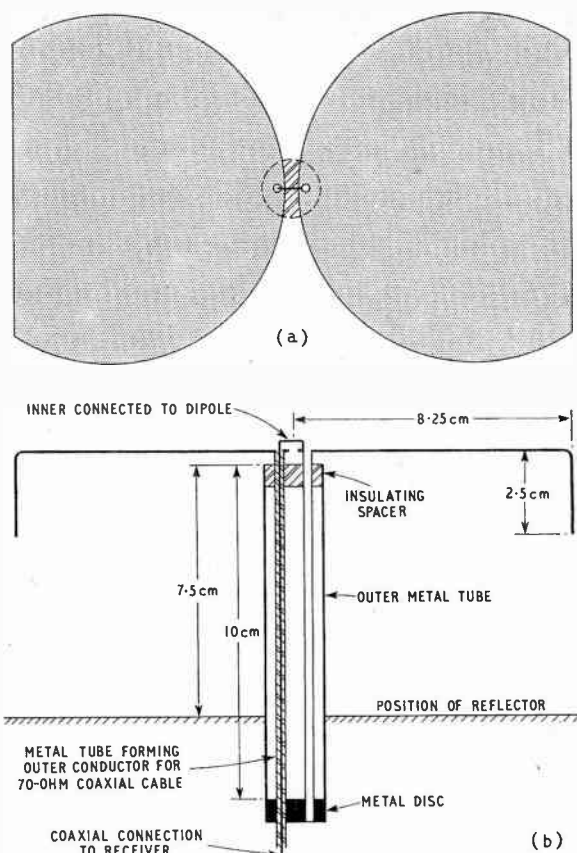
Horizontal dipole (type K) with balun; (a) front view, (b) plan view showing balance-to-unbalance transformer
